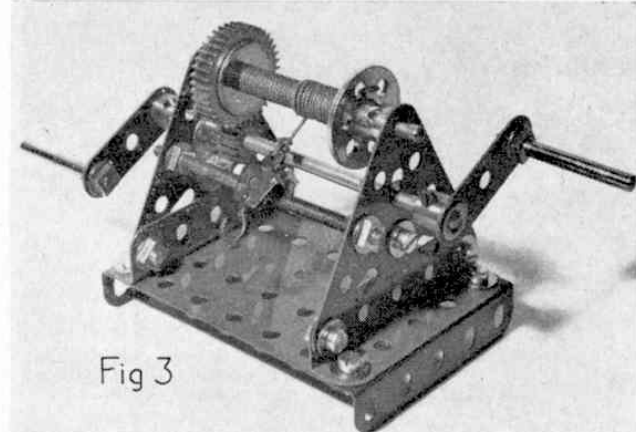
Two-handed donkey winch. Note non-standard spacing of gears making use of the slotted holes in the triangular side plates.
